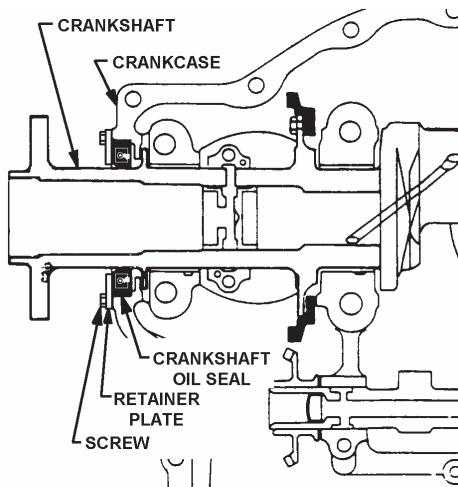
Retainer Plate and Screws on Front of Crankcase
